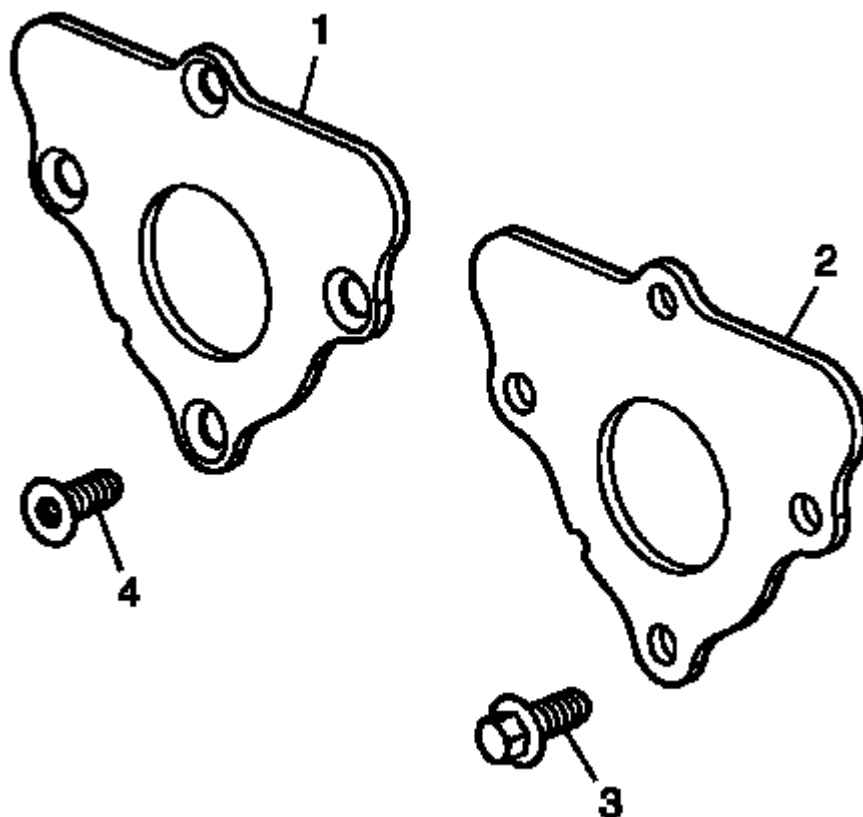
View Of Camshaft Intermediate Drive Chain Idler & Bolt
